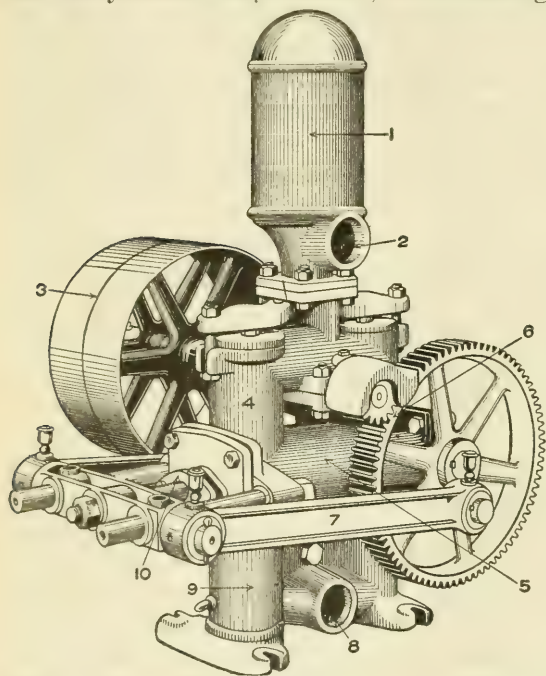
Typical simplex, double-acting displacement pump. 1, Air chamber; 2, discharge opening; 3, tight and loose pulleys; 4, valve chamber; 5, cylinder; 6, gear; 7, connecting rod; 8, suction opening; 9, base; 10, packing gland.
